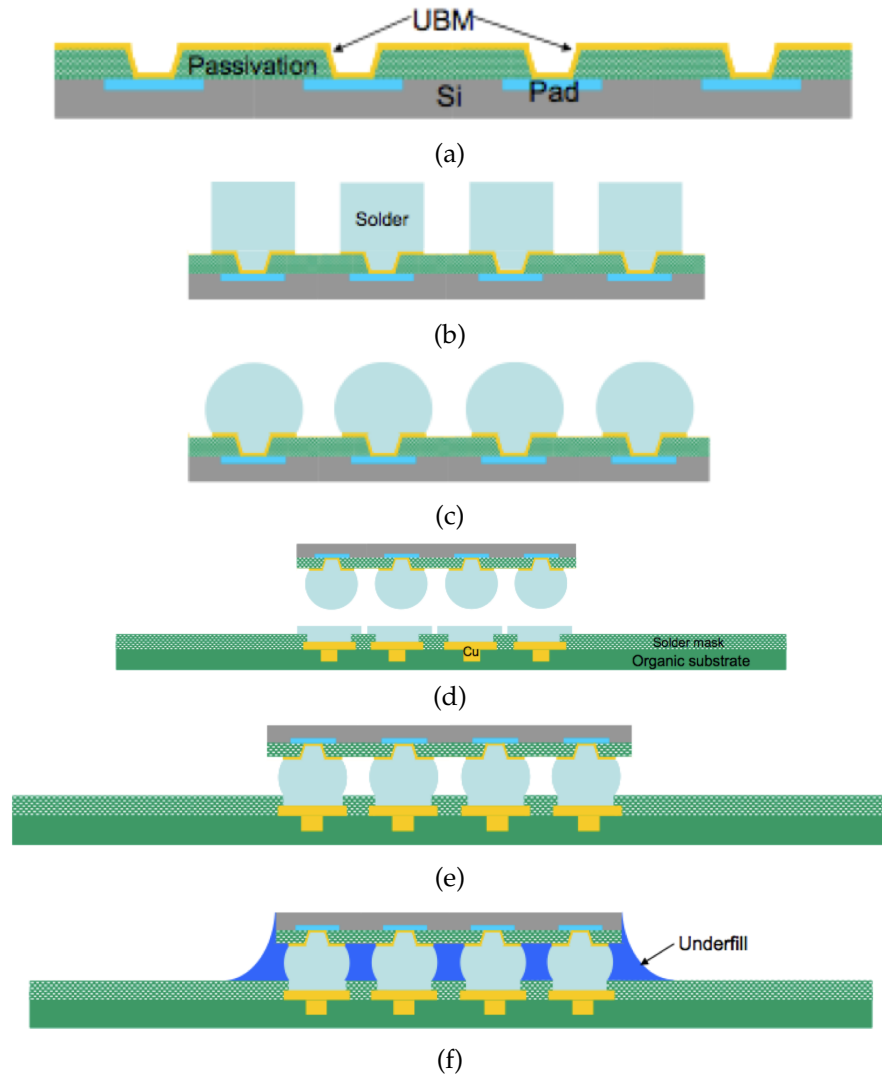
Schematic of flip chip packaging assembly process [116]: (a) wafer repassivation and UBM deposition; (b) bumping; (c) solder reflow; (d) and (e) laminate joining; (f) underfill encapsulation.
